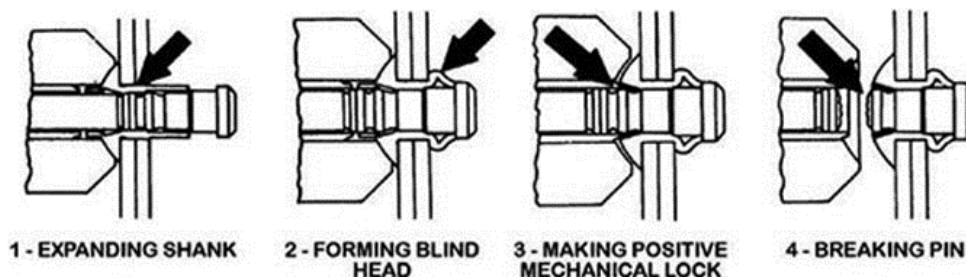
Mechanical-lock blind rivet installation sequence.
